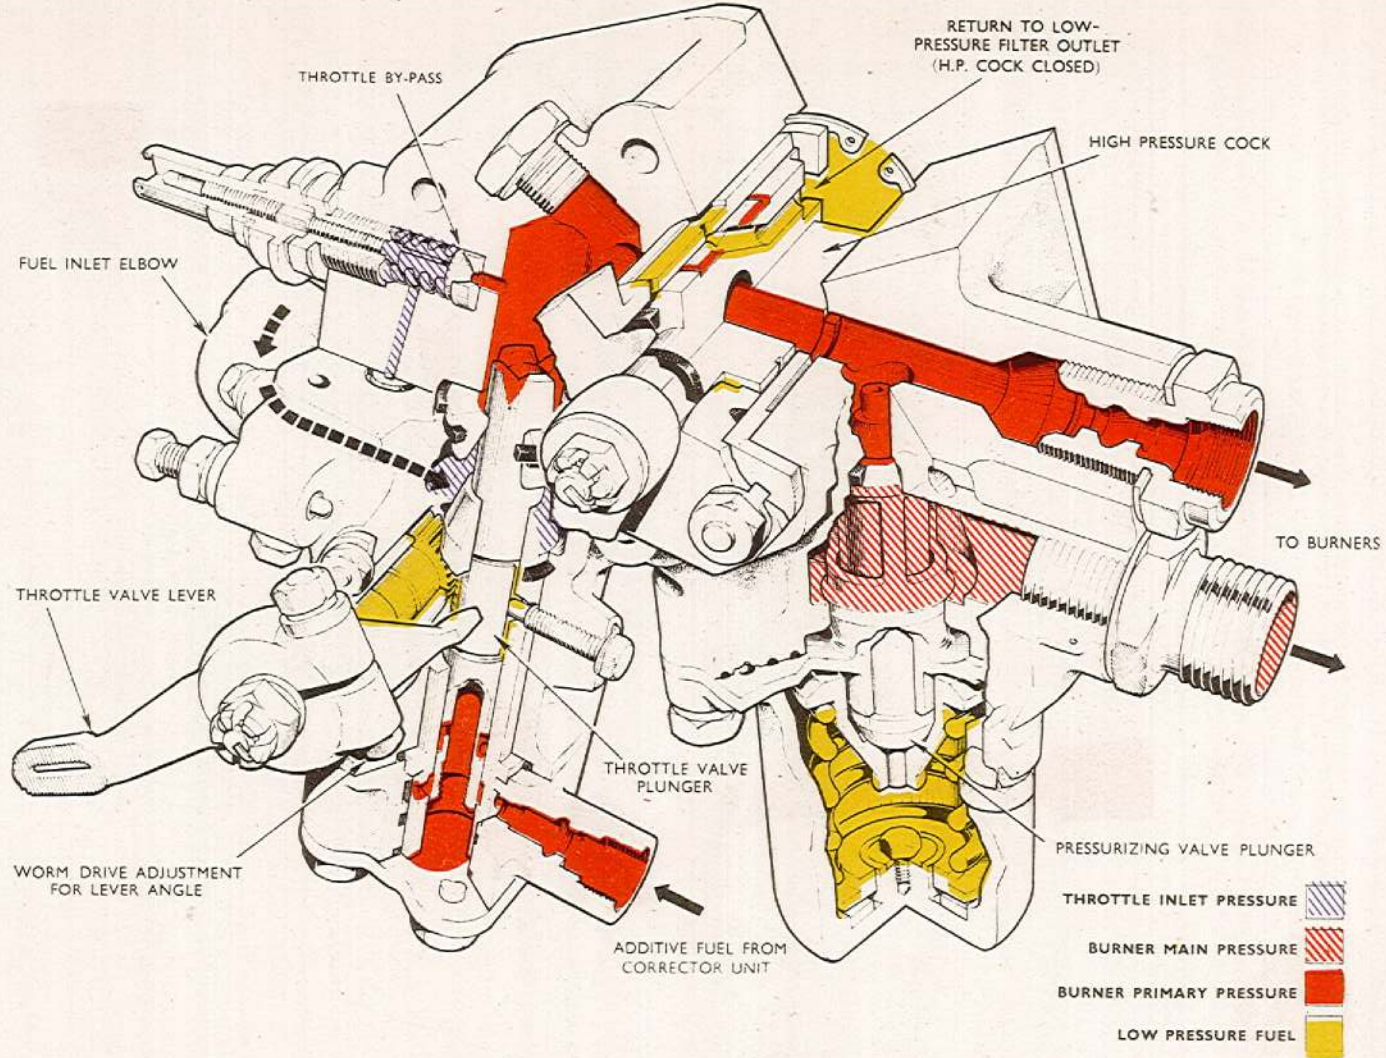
Pressurizing valve, H.P. cock and throttle valve (BA. 81149)
